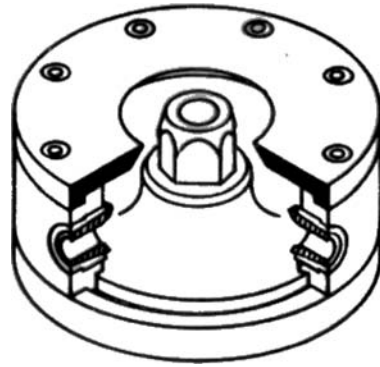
Abrasion-resistant bushing atomizer wheel. (Niro.)
